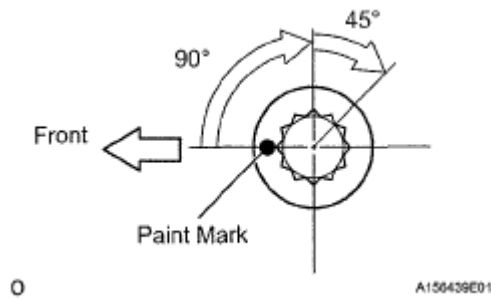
Identifying Cylinder Head Bolts Tighten Angle
